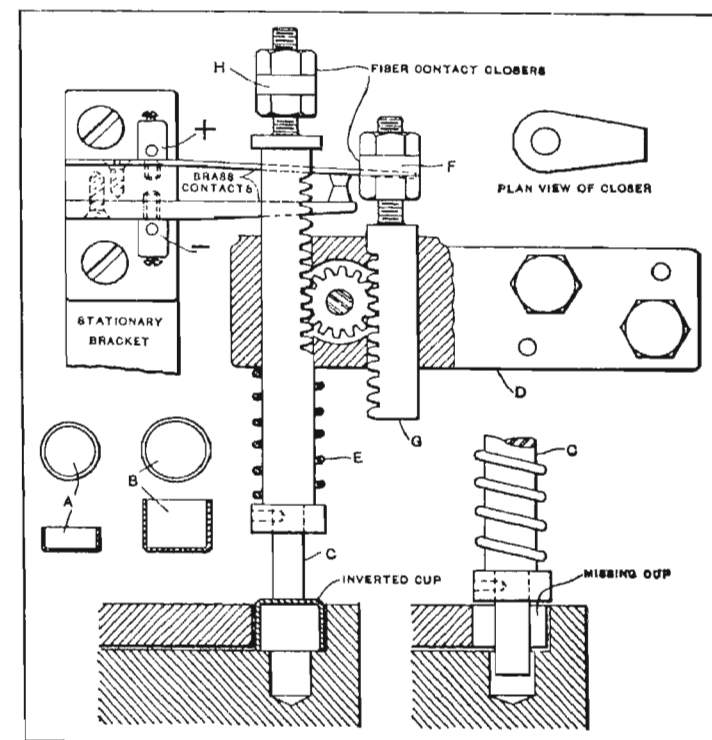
Circuit-closing Device Used on Machine for Assembling Shells *A* and *B
